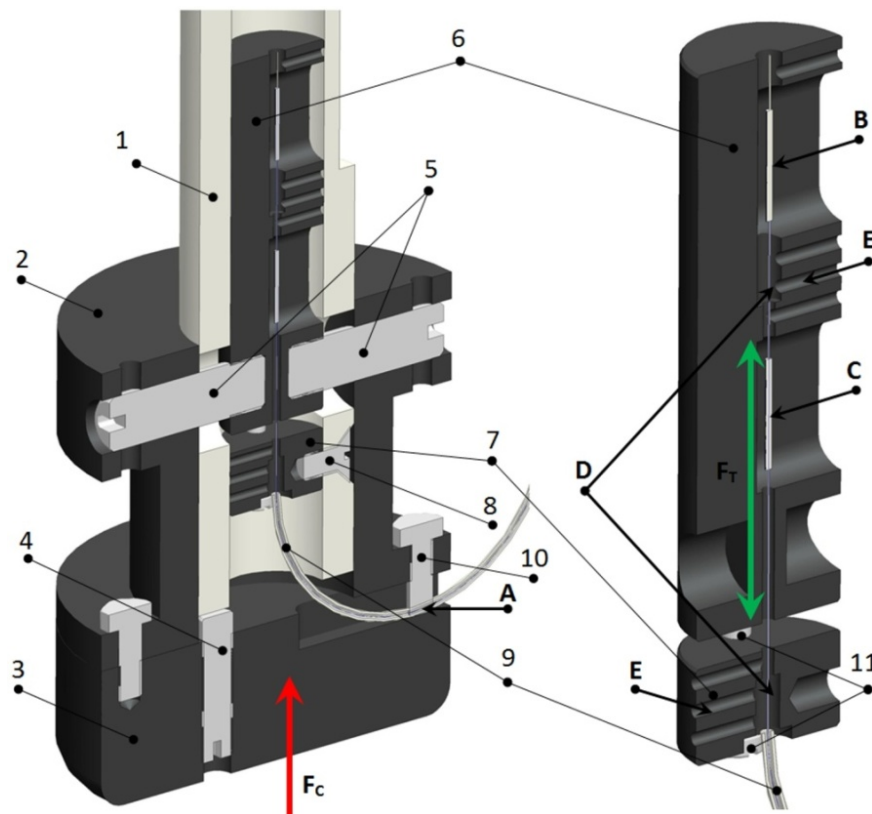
The indenter head (left) and force sensor assembly (right).
